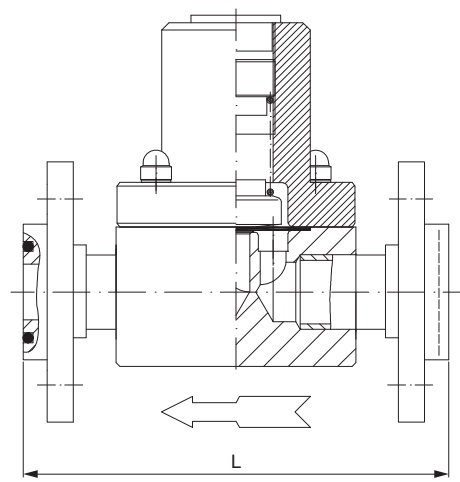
Dimensions PP, PVC, PVDF, with flange
